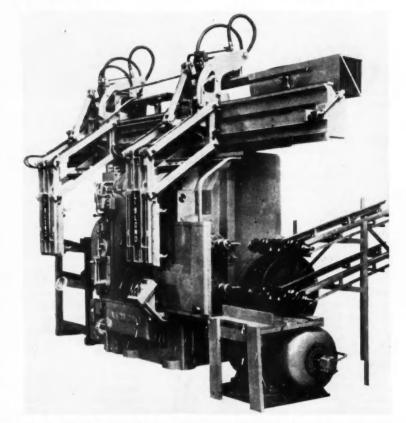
Type 6AC pin lathe with automatic loader. Side view to disclose two sets of hooks on each arm.
